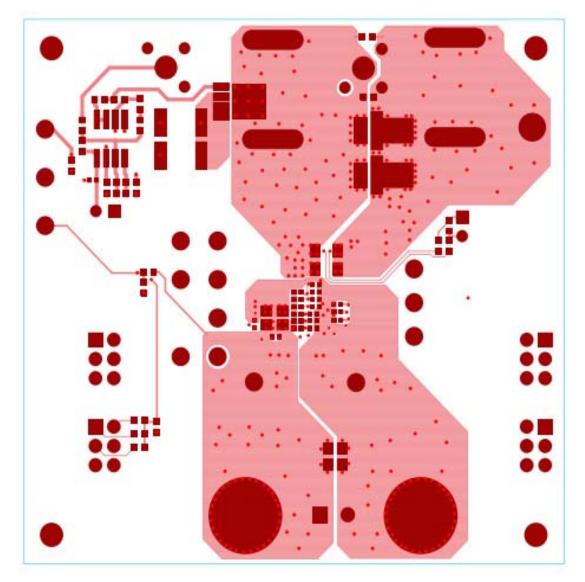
PCB - BOTTOM LAYER (TOP VIEW)
